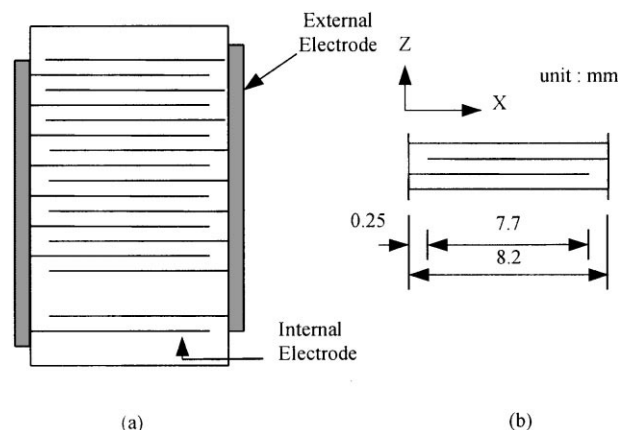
(a) Cross-section and (b) dimension of the MPA.
